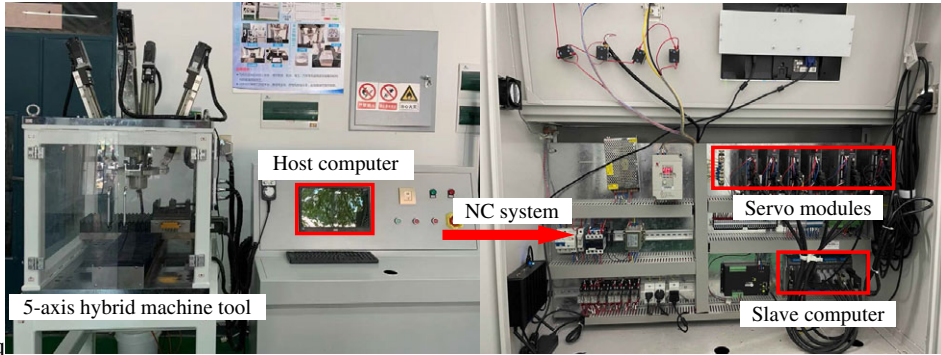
NC system of the developed 5-axis hybrid machine tool.
